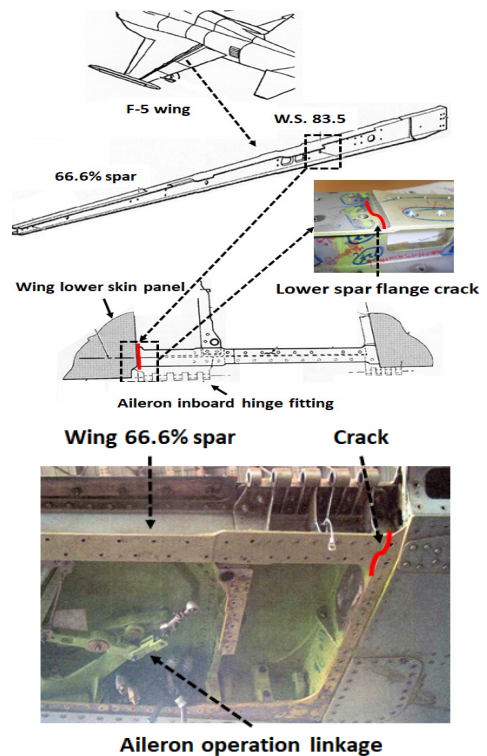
Crack defect in F-5 wing 66.6 % spar
